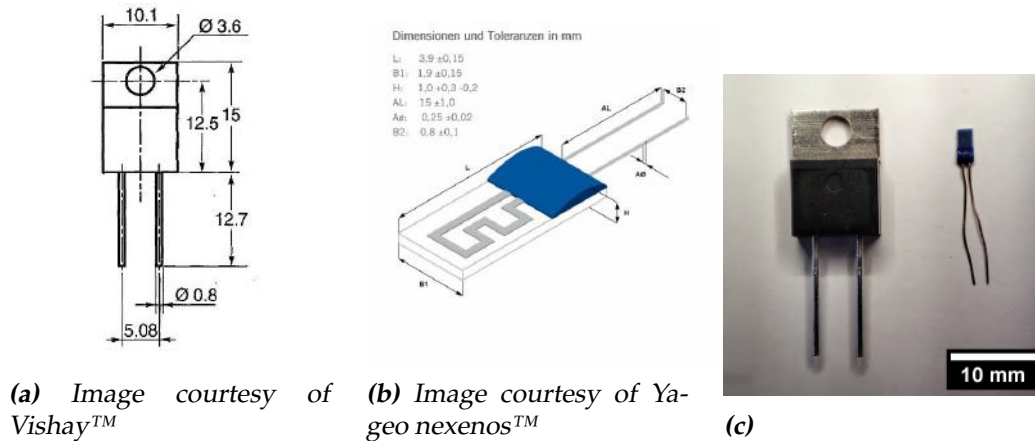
(a): technical drawing of the Vishay 47Ω 50W RTO050F47R00JTE1 resistor, (b): technical drawing of the Yageo Nexensos 32207502 PT-1000, (c): The used components
